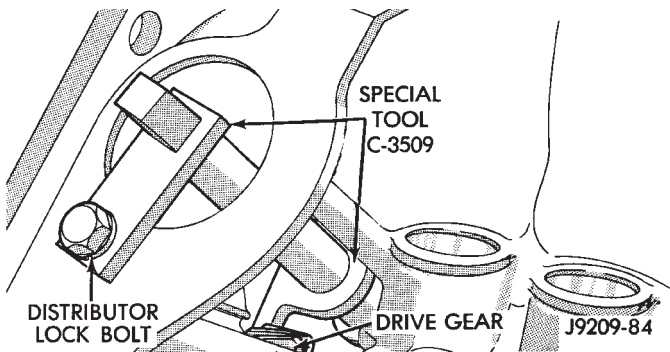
Camshaft Holding Tool C-3509 (Installed Position)
